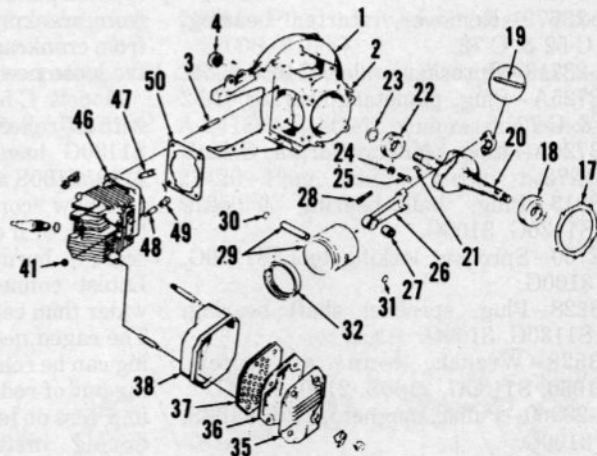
Exploded view of powerhead used on Model 2100. Models 2100S and 3100G are similar. Some models use two conventional piston rings instead of head land type ring shown. Be sure piston rings are of same type.
